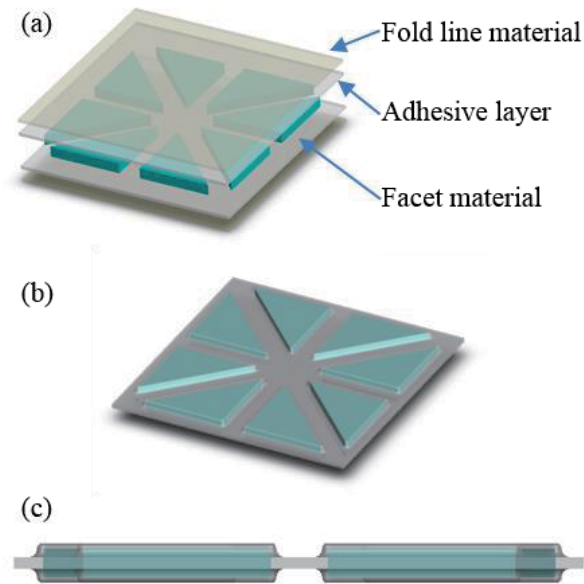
Concept design of pattern enclosed composite. The facet materials are machined and enclosed by the fold line material. (a) Structure components, (b) Laminated shape, (c) Side view of result.
